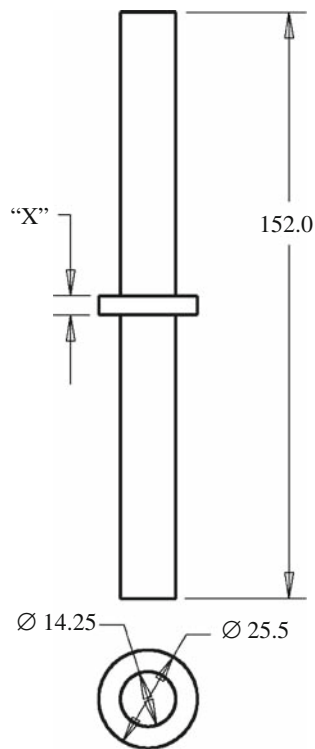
Dimensions of cast porous specimen blanks in millimeters. Dimension “X” = 5, 7.5, and 10 mm for the “least,” “middle,” and “most” porosity specimen groups, respectively.
